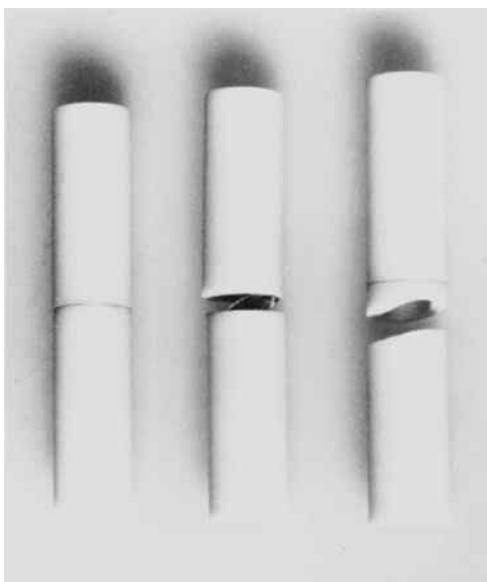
Hot modulus-of-rupture test specimens of alumina-platinum-alumina bonds formed in identical conditions. Left: unbroken specimen, middle: specimen fractured through the bond, right: specimen fractured through the alumina
